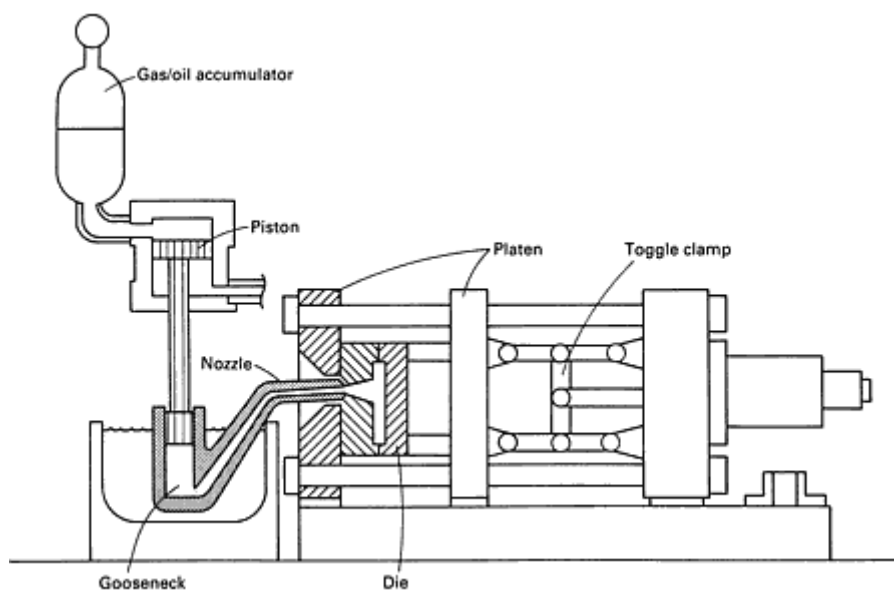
Schematic showing the principal components of a hot chamber die casting machine
